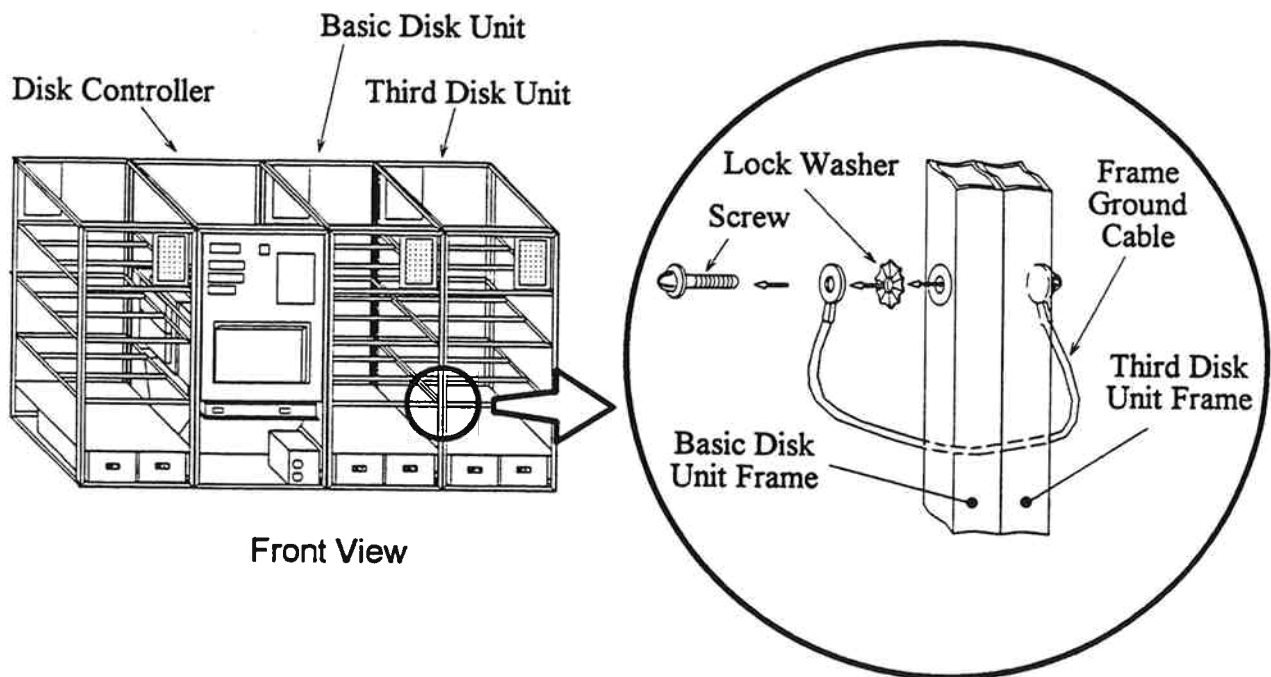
Removal of Frame Ground Cable
